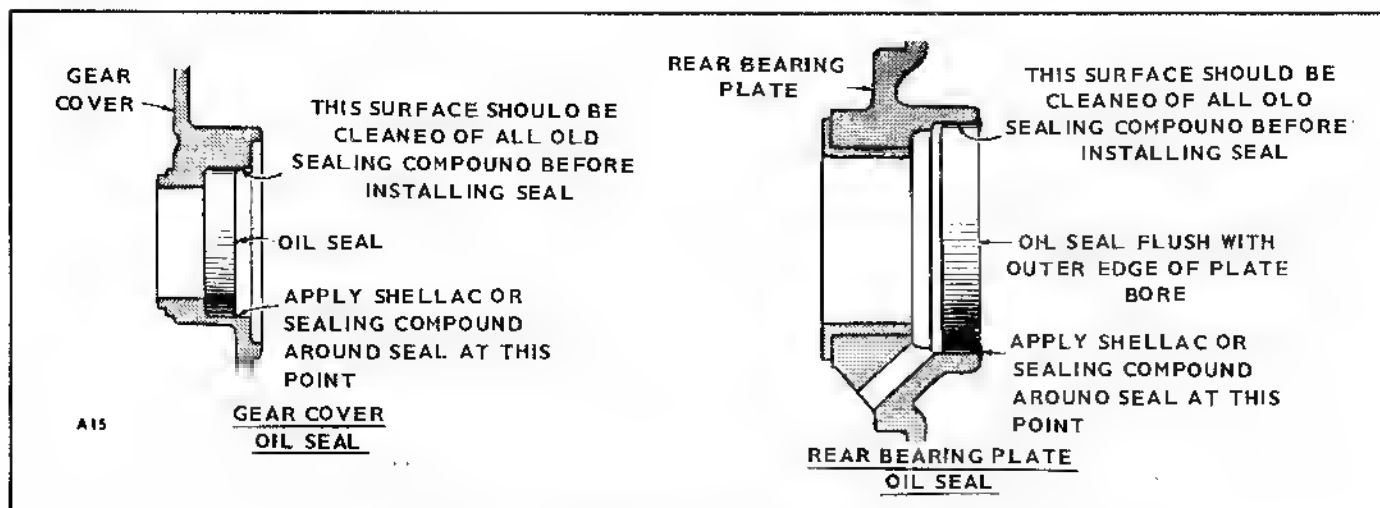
GEAR COVER AND REAR BEARING PLATE OIL SEALS
